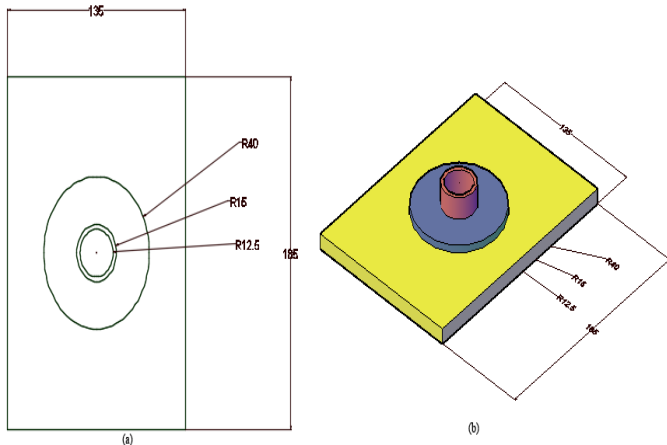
Radial Drill Head Feed Box Housing modelled in AutoCAD
